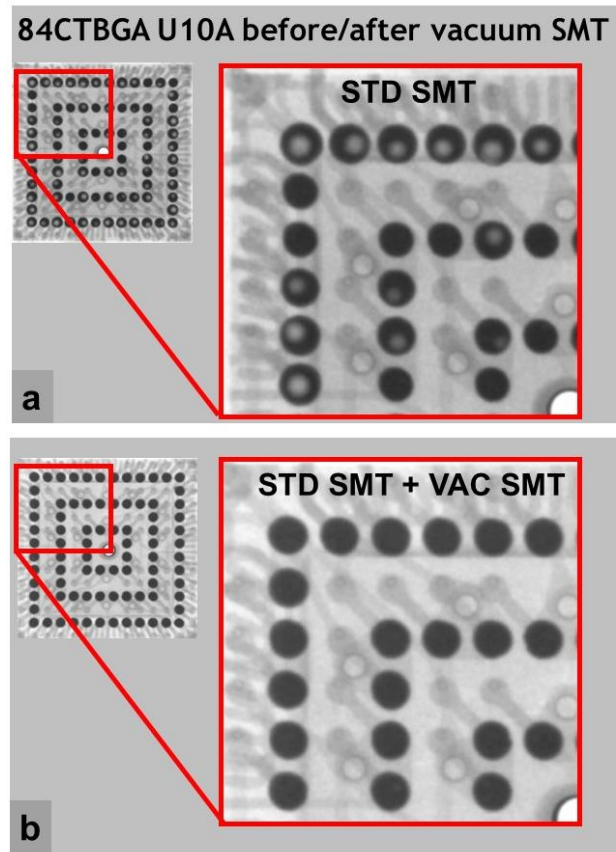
Transmission x-ray images of a) a typical heavily voided 84CTBGA after SMT assembly and b) the same 84CTBGA with solder voiding eliminated by subsequent vacuum reflow processing.
